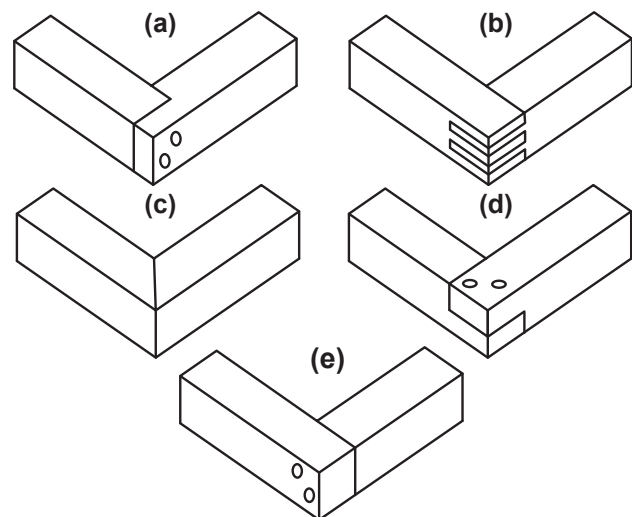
(a) Rabbet joint, (b) finger joint, (c) miter joint, (d) end-lap joint, and (e) butt joint.
